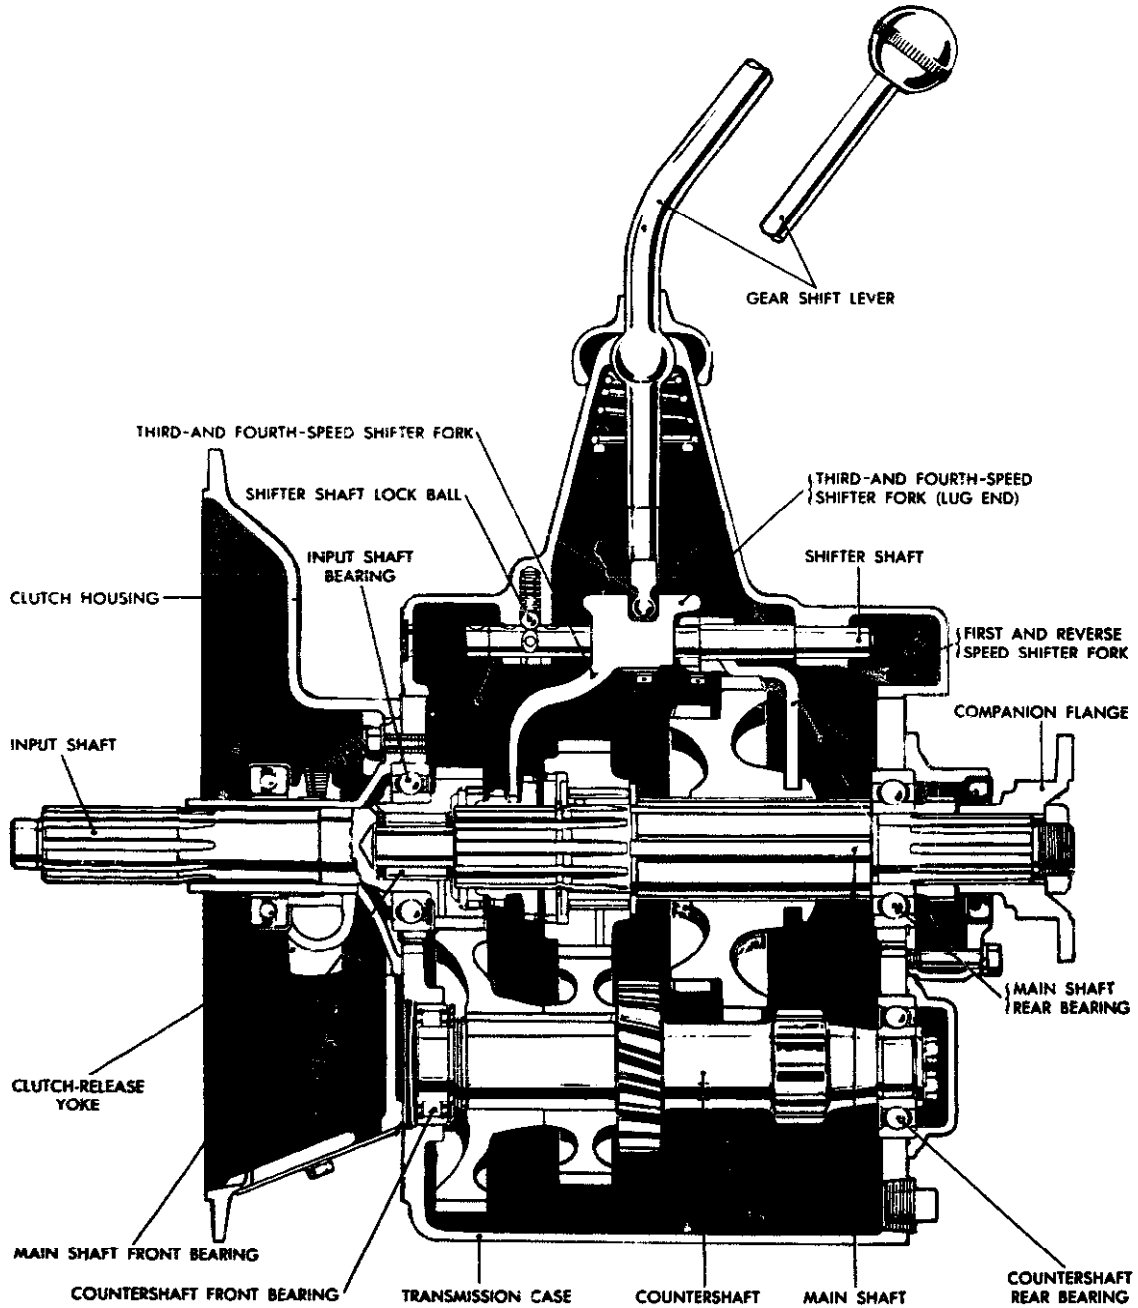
Constant-mesh transmission assembly—sectional view.
